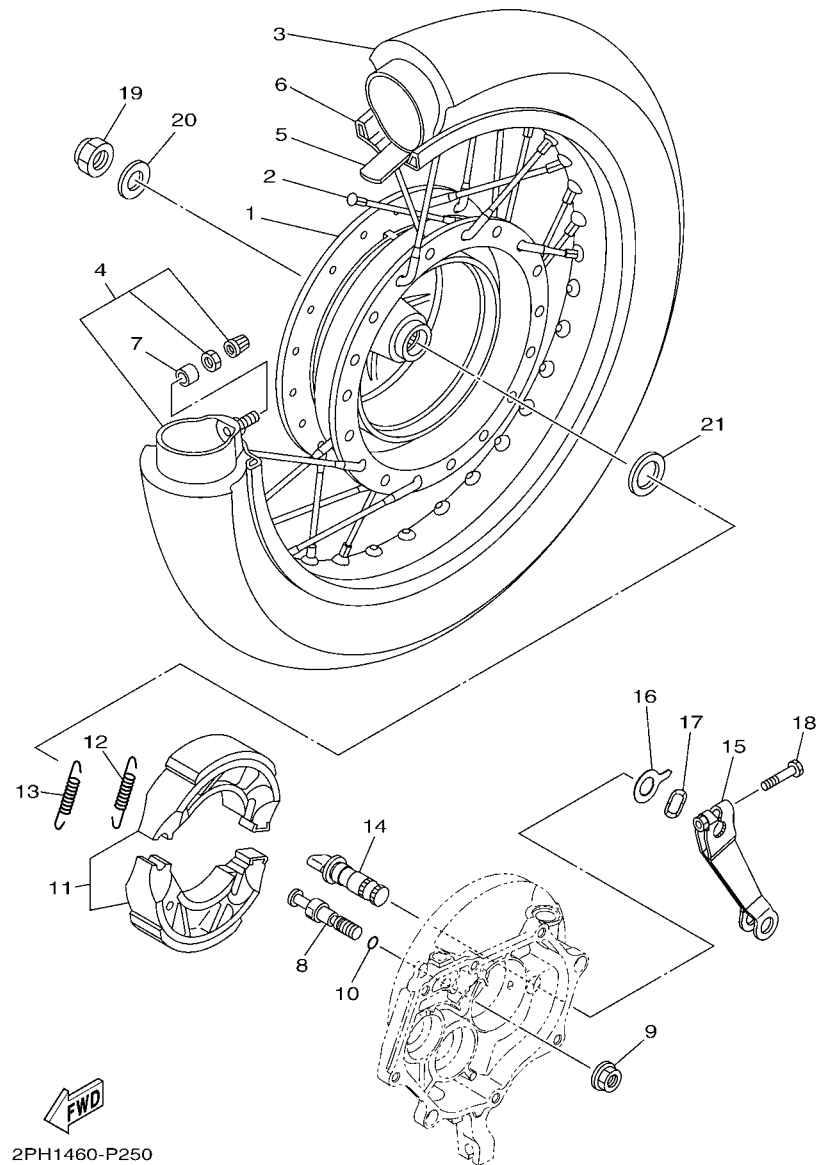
REAR WHEEL FOR SPOKE WHEEL
